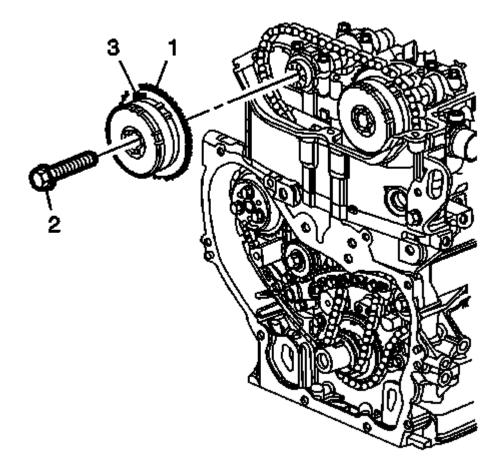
Exhaust Camshaft Sprocket Courtesy of GENERAL MOTORS CORP.
